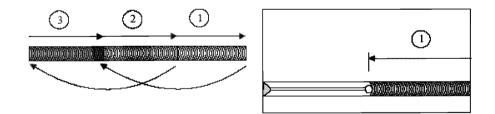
c Welding sequence for cracks with length less than 300 mm
